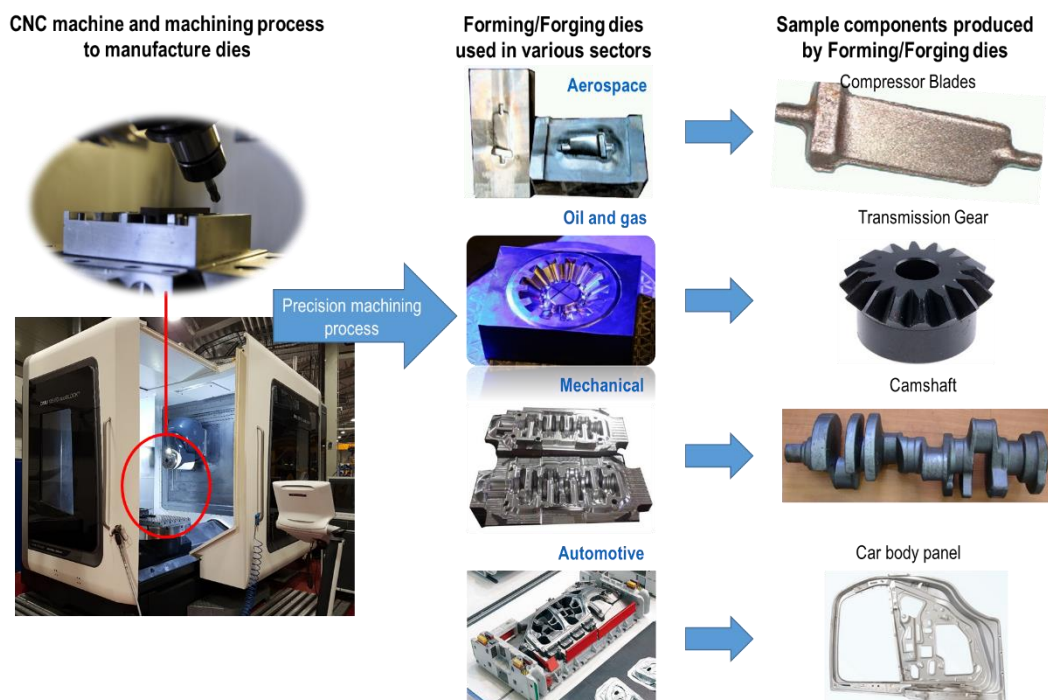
Typical precision machining industries and applications for forming and forging dies [1-3]
